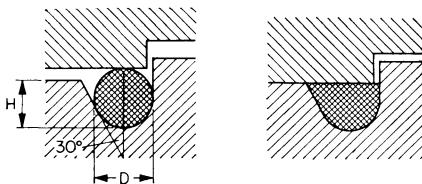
O-ring seal, in ovoidal cross section groove
